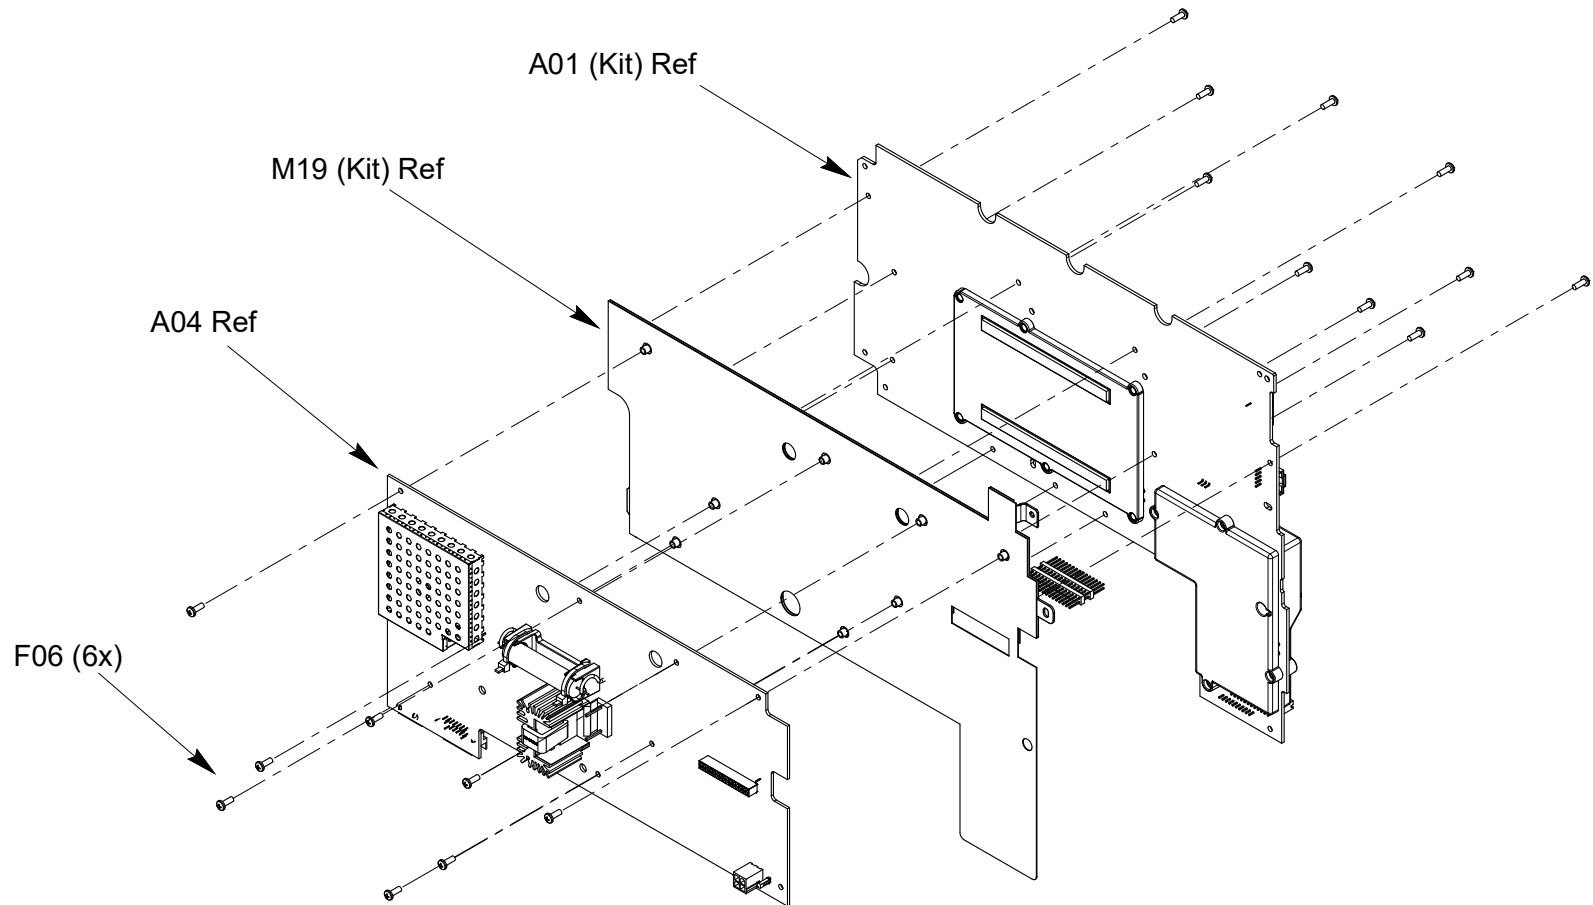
System/Therapy PCB assembly view 1 of 2
